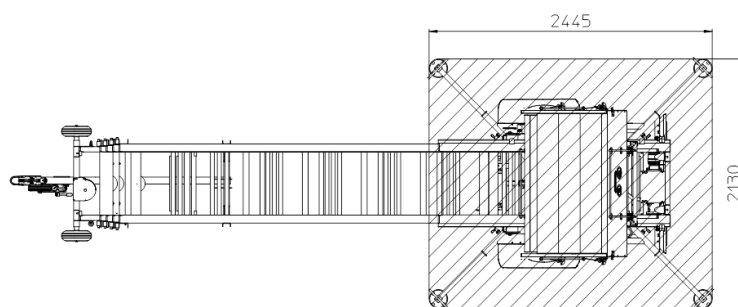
Support area of brake-assisted machine with retracted drawbar (in m)
